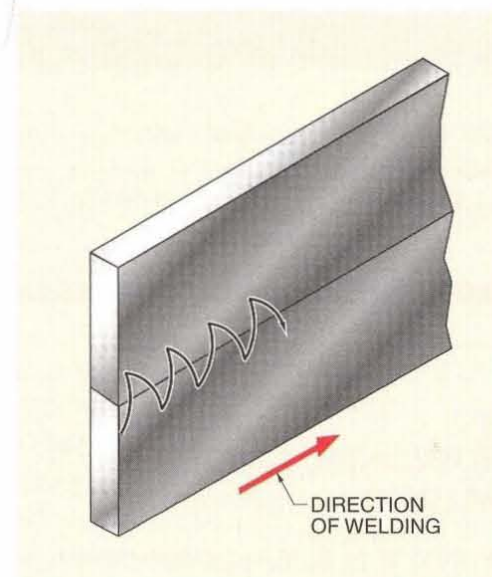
Use a slight weaving motion when welding in horizontal position to distribute heat more evenly.
